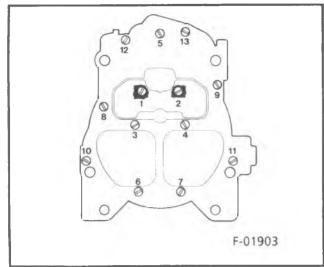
Air Horn Screw Location and Tightening Sequence
